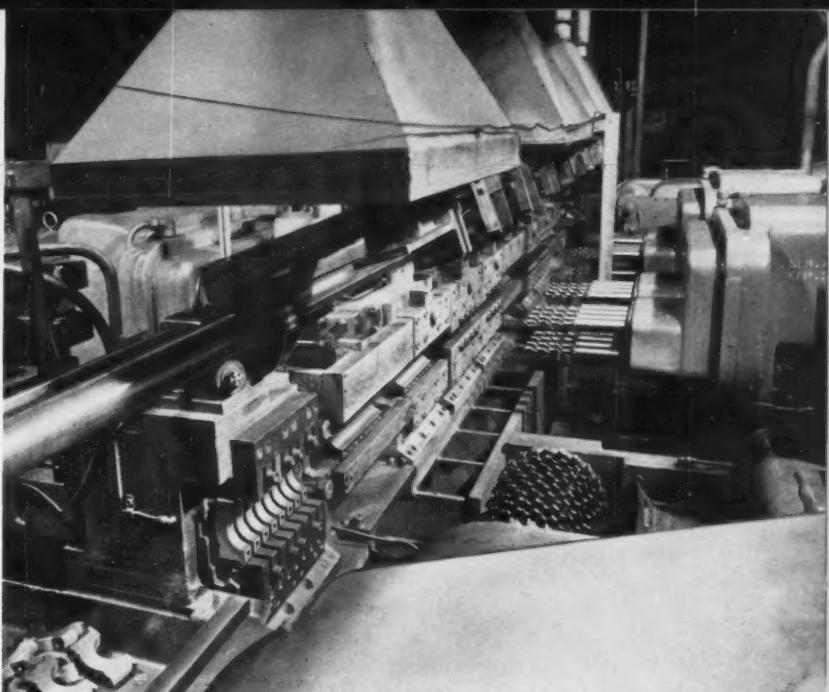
(Left) Close-up view of a special transfer machine for boring and facing automatic transmission housings. A similar machine is used for standard transmission housings.
